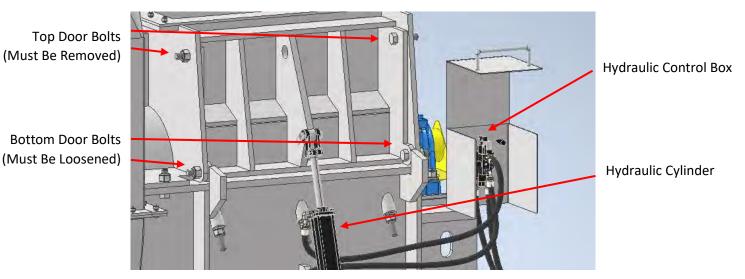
Rear Door Bolts (Hydraulic Rear Door)
